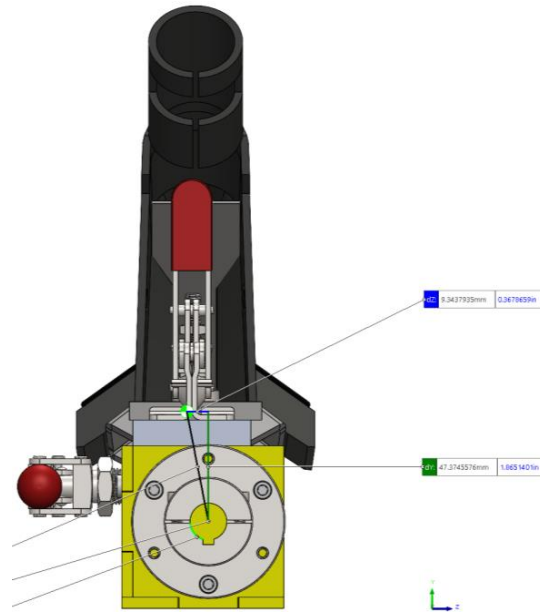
Clamping mechanism with CBBTD0 seeding opener.
